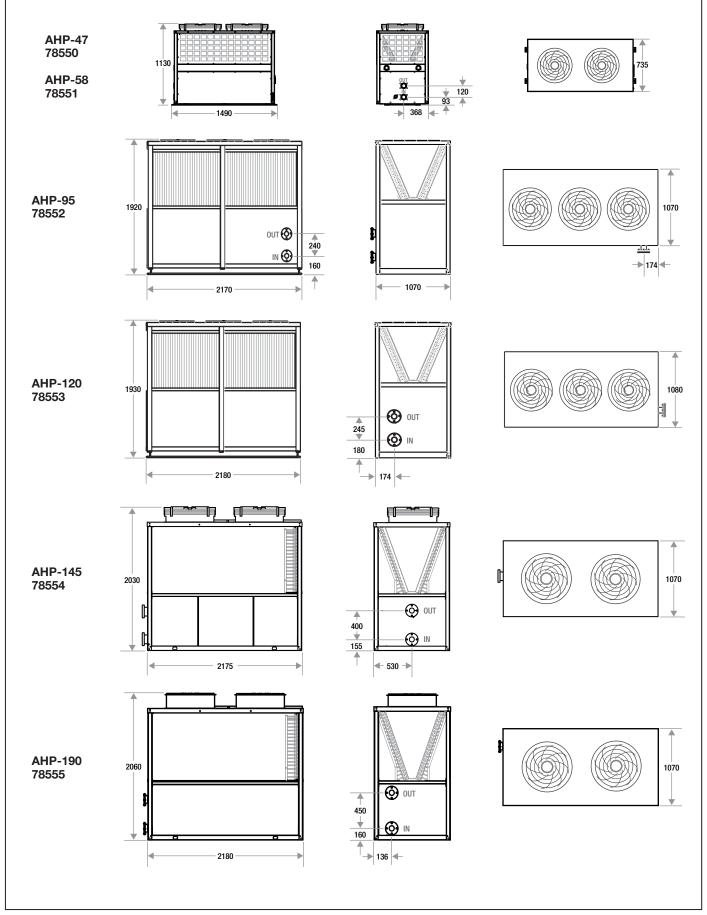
Overall Dimensions & Inlet/Outlet Locations (mm)
